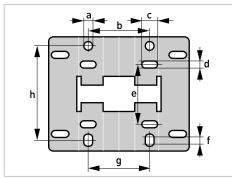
Dimensions of mounting plate of wall-mounted housing
